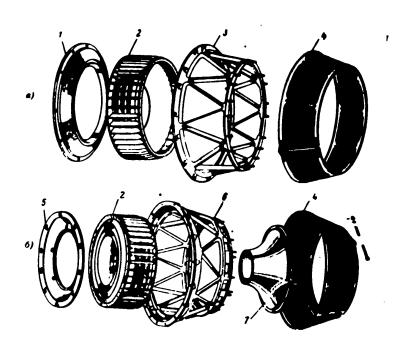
Front a and Rear b Truss Rings with Attaching Parts of a Centrifugal Compressor Engine.
